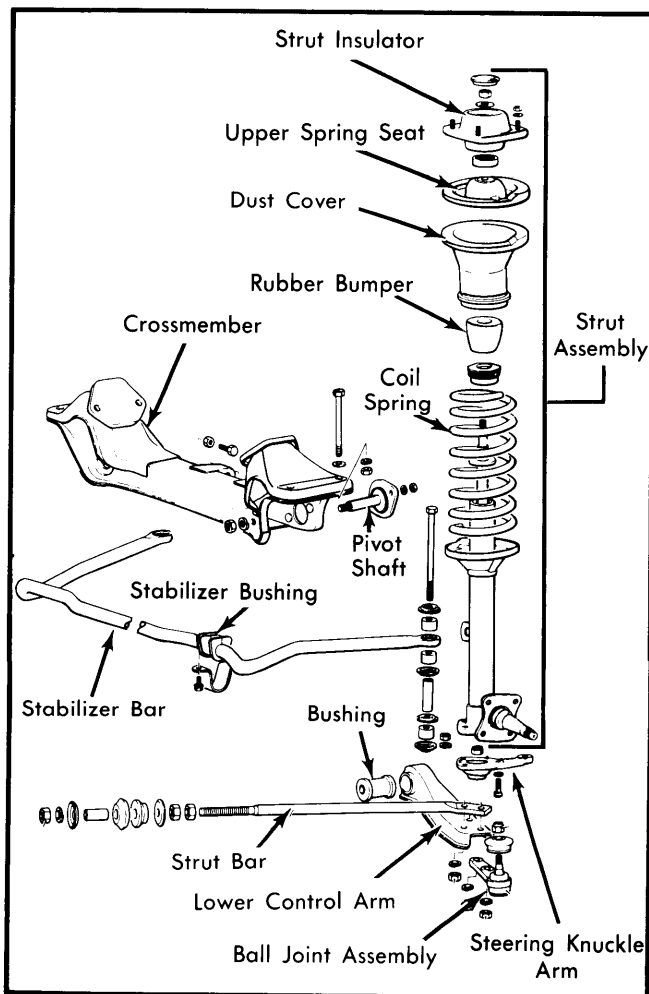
Exploded View of Front Suspension (Rear-Wheel Drive Models)
